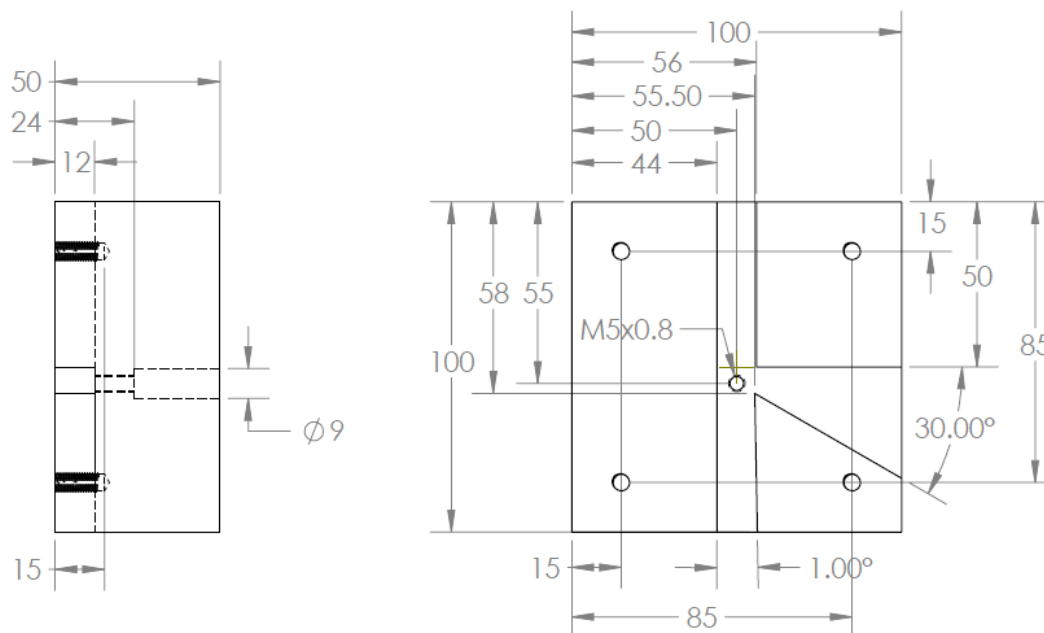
Part drawing of  $30^\circ$  cutting die used for cutting experiments (dimensions in mm)
